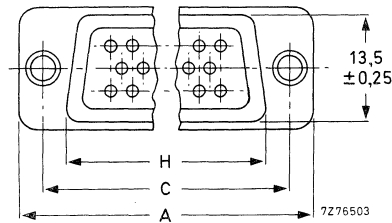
Terminal side of pin (or socket) connector; see also Table 6.
